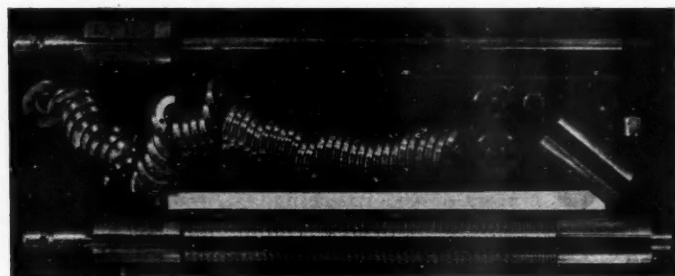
Finishing is done in a horizontal Oilgear machine handling one ring per broach. Two operators are required, one per broach, the output being 500 pieces per hour to balance the roughing operation
